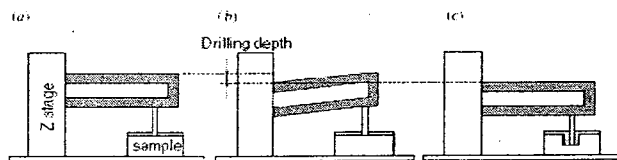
Steps of gravity feed drilling: a) Tool starts in contact with glass surface b) The flexible structure to which the tool is attached is moved down, placing the weight of the structure on the tool. A machining voltage is applied, and machining begins. c) The desired depth is reached and the voltage is switched off [3].
